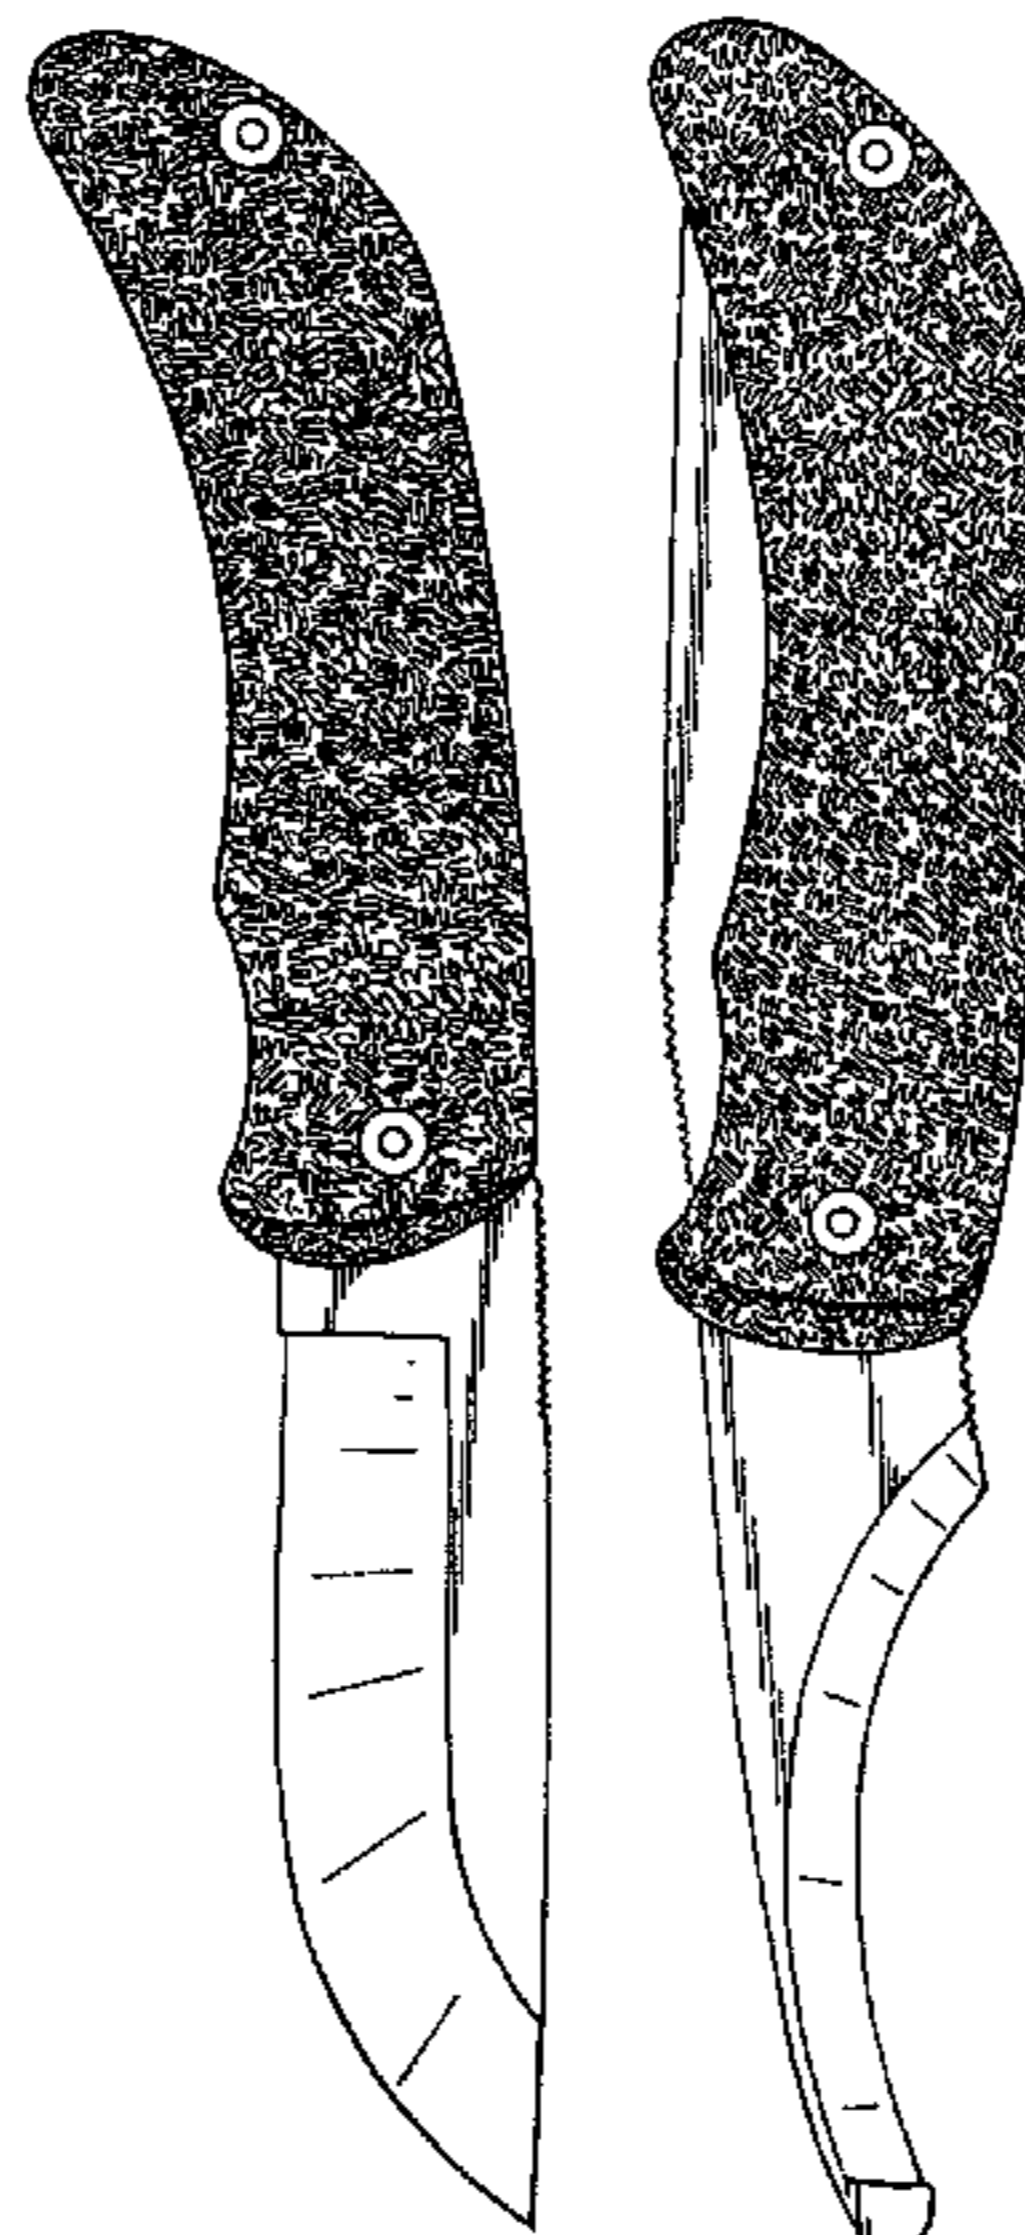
is a bottom side view illustrating the knife with the gutting blade and the skinning blade exposed;
